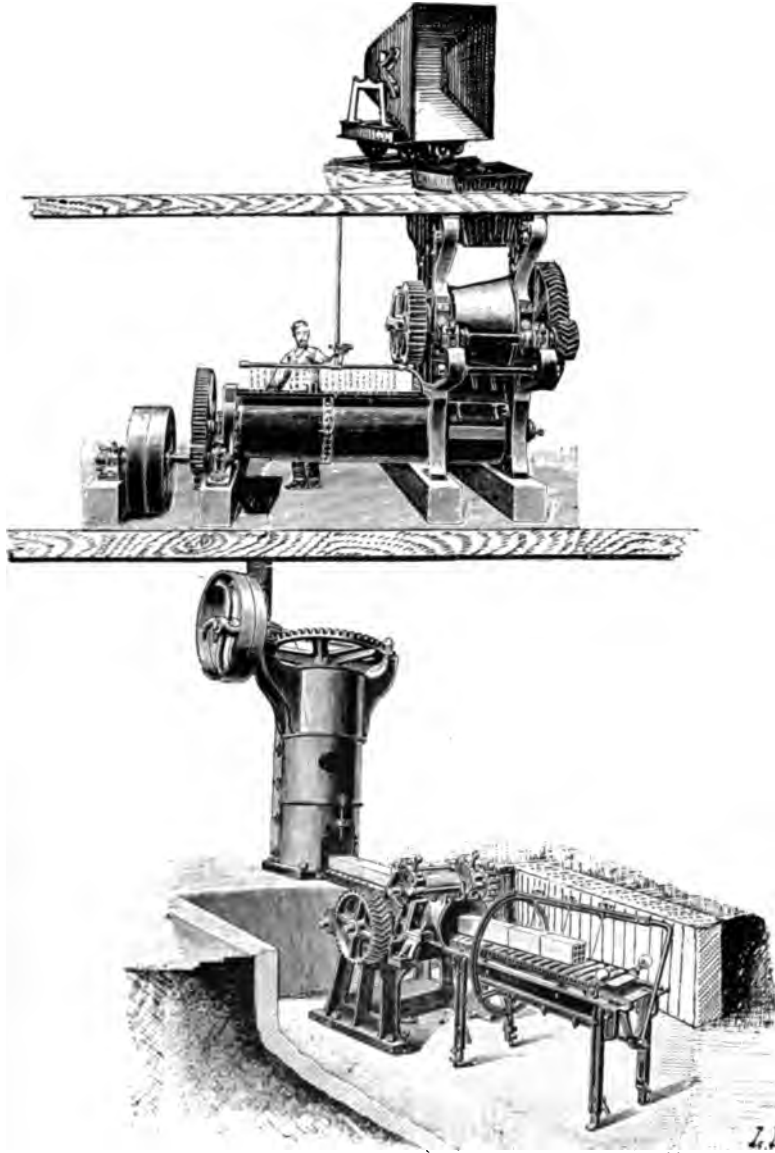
Type of Installation comprising Separating Cylinders, Damping Machine, Pug-mill, and Cylinder Expression Machine.
